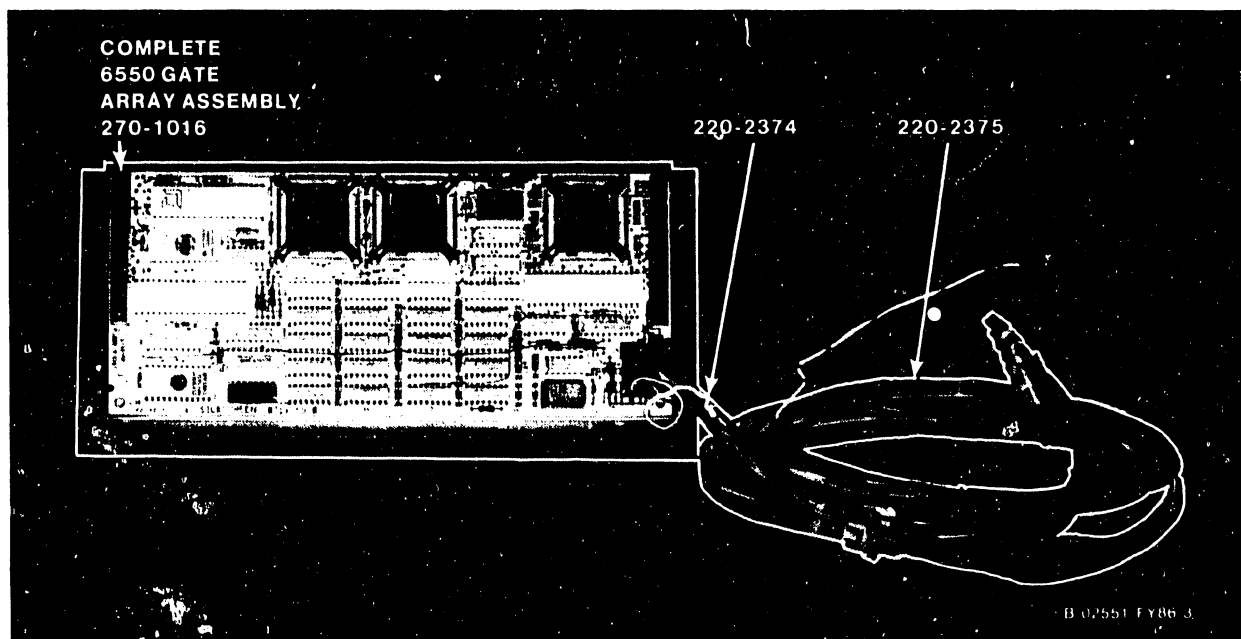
VS-300 Gate Array TC Back Panel Assembly With Cables
